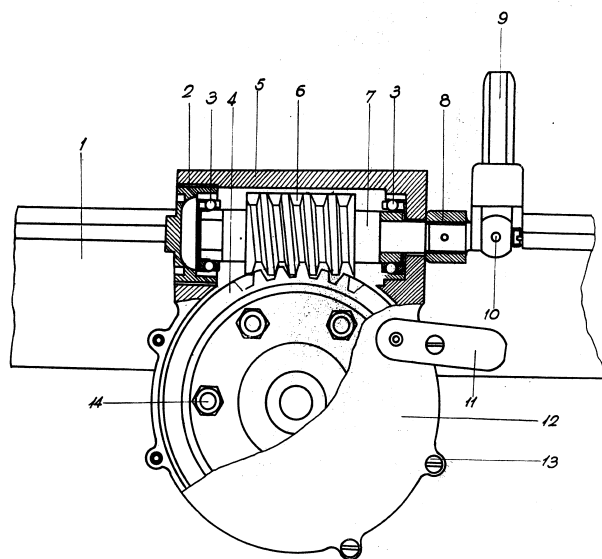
ELEVATING MECHANISM — WORM BOX ASSEMBLY
